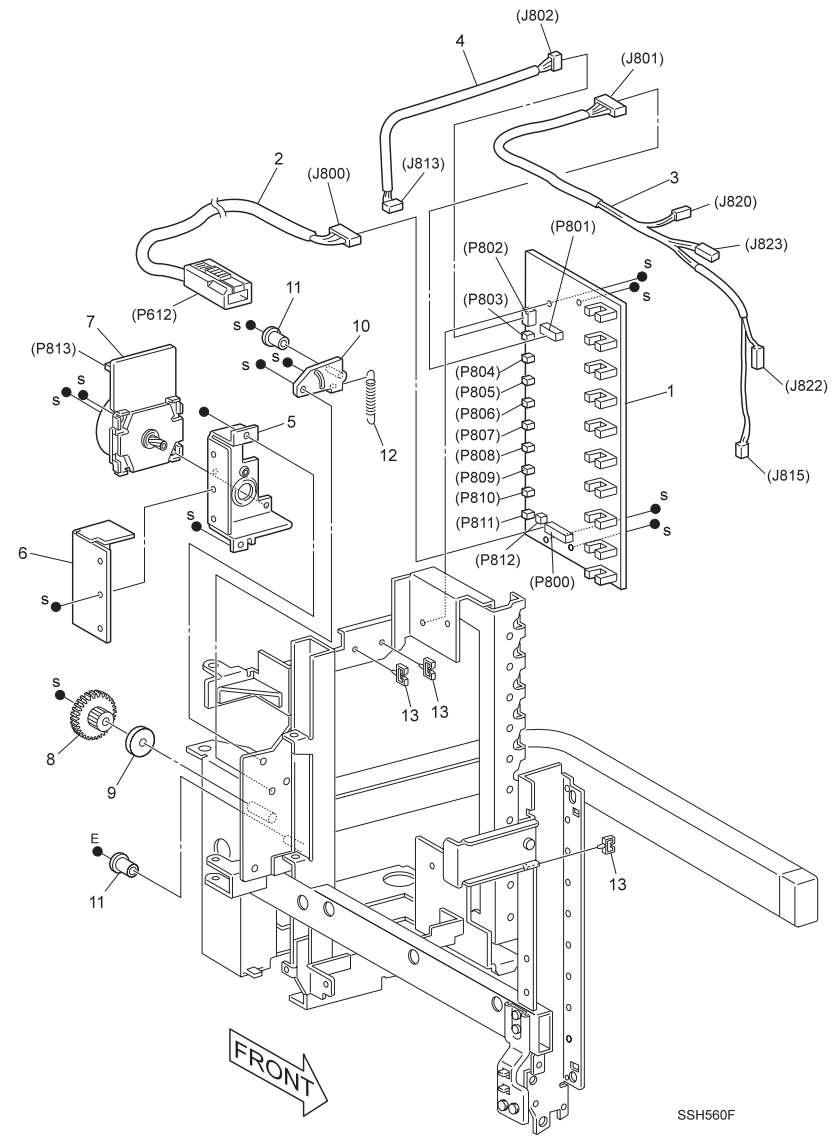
Sorter Control PWB and Sorter Drive Motor
